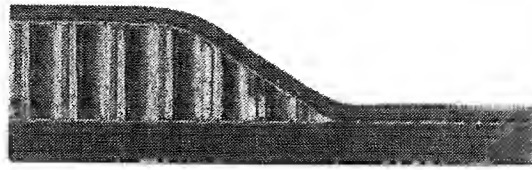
Ramped Core Close-Out Manufacturing Demonstration.
